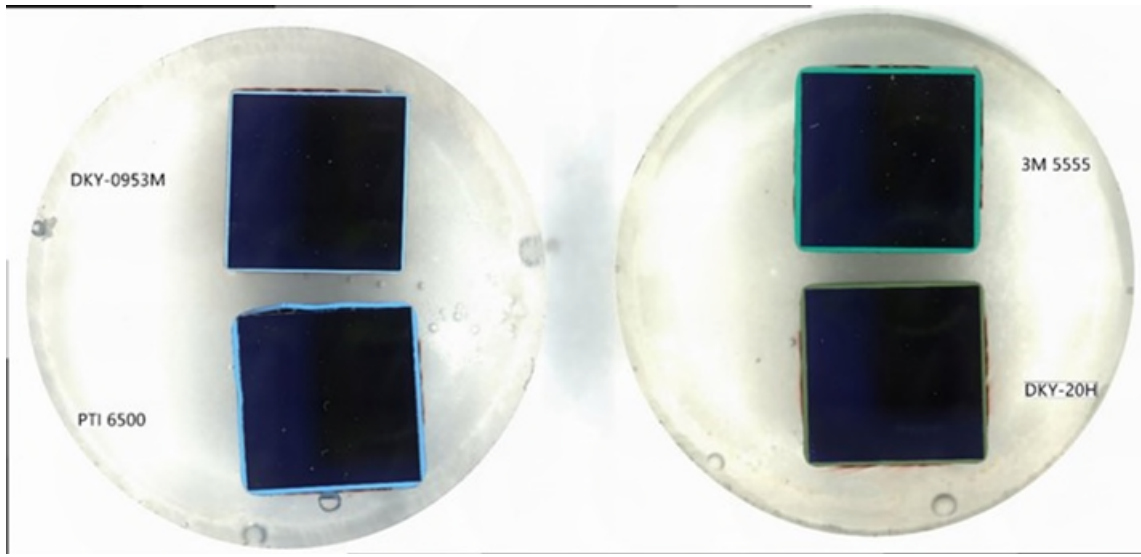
Face and Edge Thickness Cross-Sectioned Coupons
